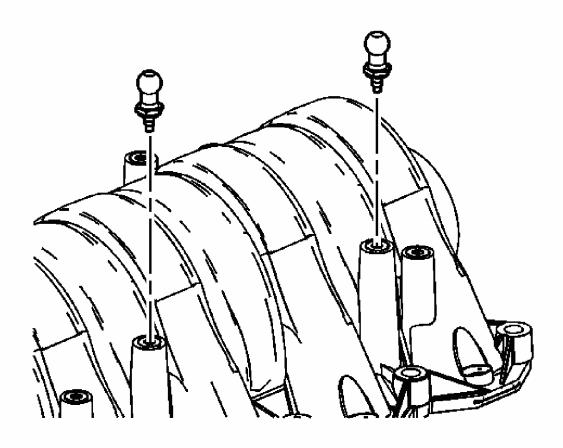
Identifying Intake Manifold Sight Shield Ball Studs Courtesy of GENERAL MOTORS CORP.
